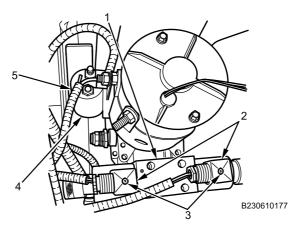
Rear Door/Ramp Hydraulic Valve Connectors.
